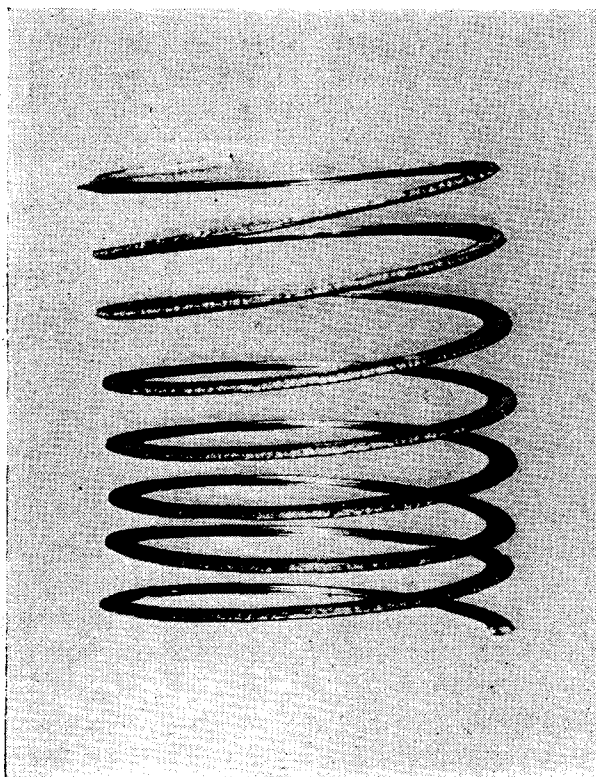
THREAD FAILURE IN NUT OF 6 FT DIAMETER
